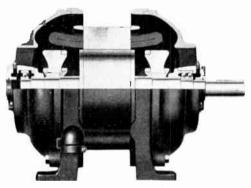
Cutaway view of screenless open motor, showing fans and air passages
